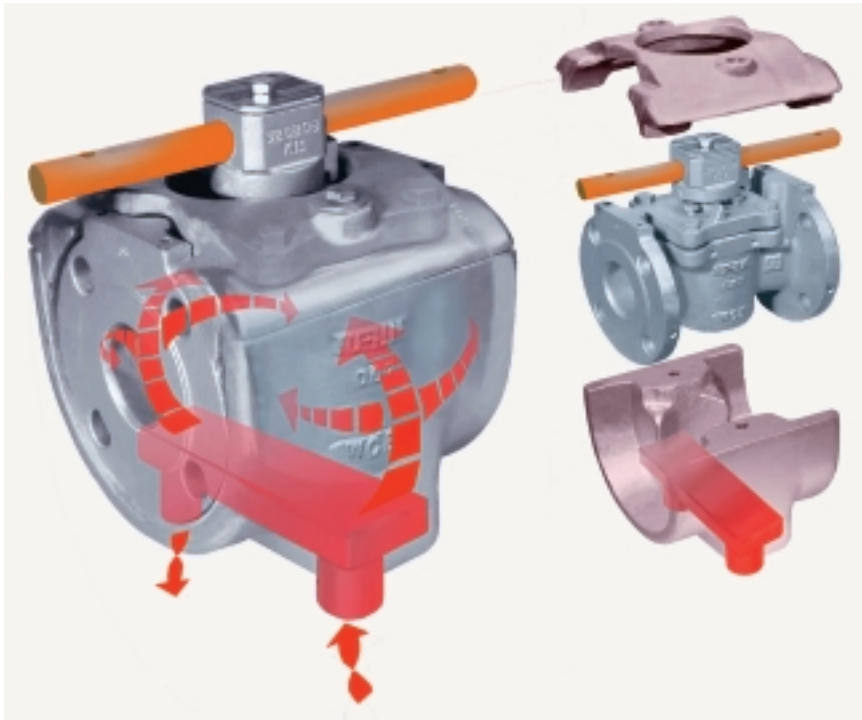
These patented heating jackets are aluminum, cast-to-fit pieces that match the contours of the components to be heated.
